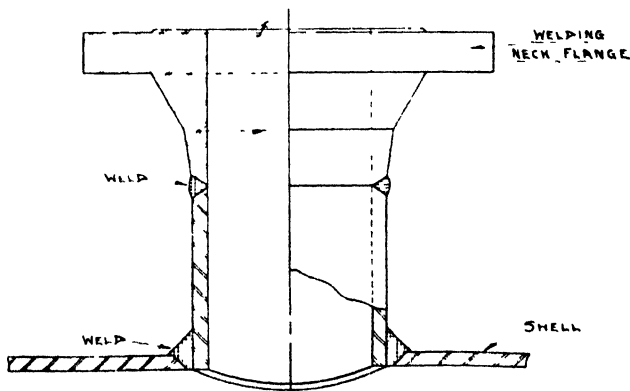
Typical welding details for flanged piping connection on storage heater.
